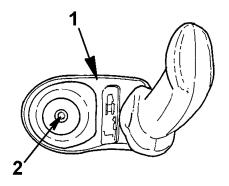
Brake and Shroud, Top View (Tall Brake Assembly Shown)
